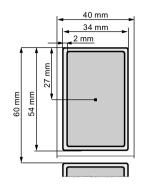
SIMATIC RF630L 6GT2810-2AB03 dimension drawing
